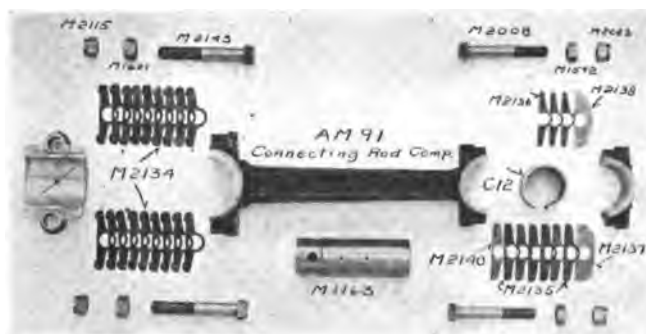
Connecting Rod Assembly for the "75" Engine.
